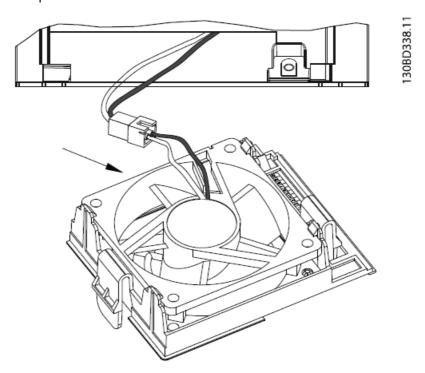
Fan Cable Plug. Plug Location Depends on Fan Type.
